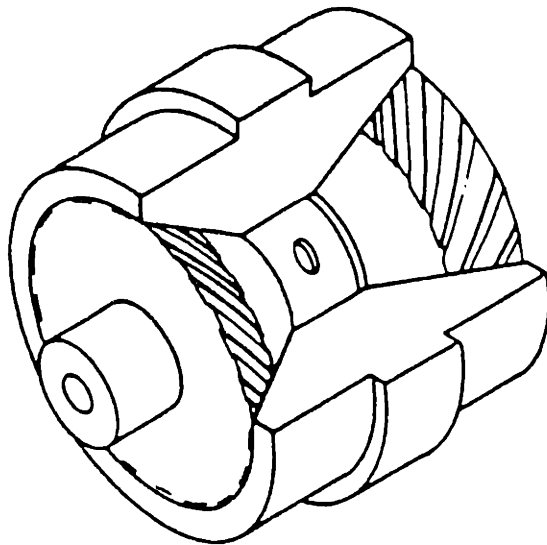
Spiral-grooved cone gas bearing (from reference [12])
